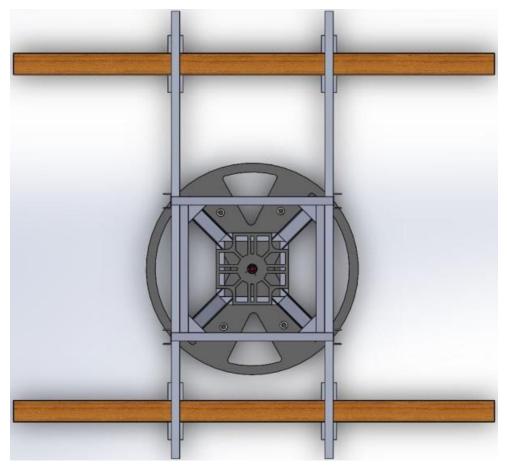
D CAD model of the Suspension and Rotation Framework Assembly(Top View)
